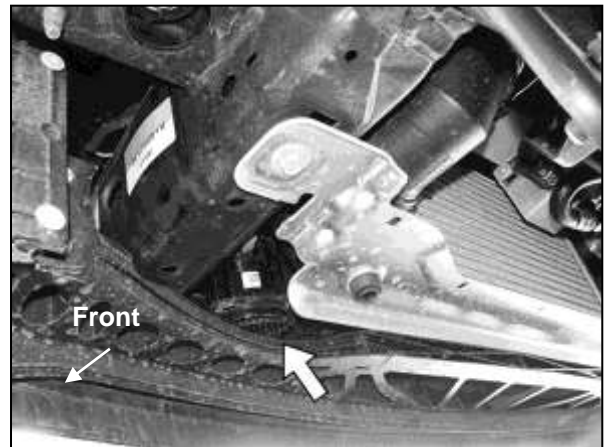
Remove bolts (arrows) to remove active air dam from motors (passenger/right side pictured)
